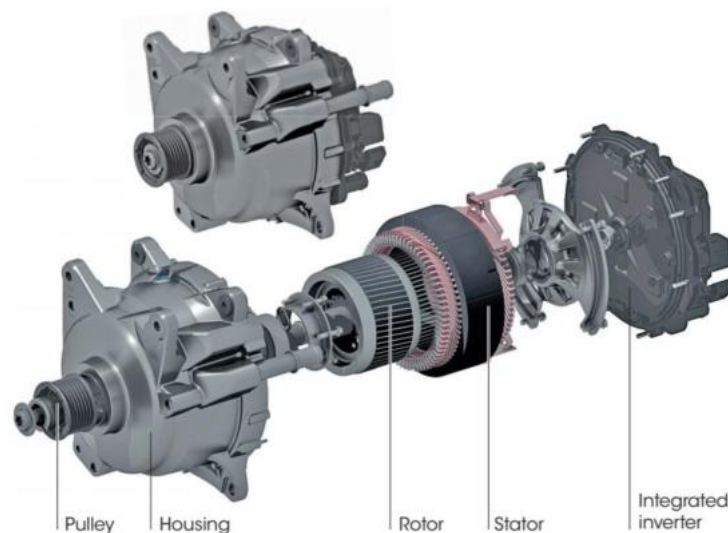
Exploded view of induction machine used in a Continental BSG product [WEB16].
